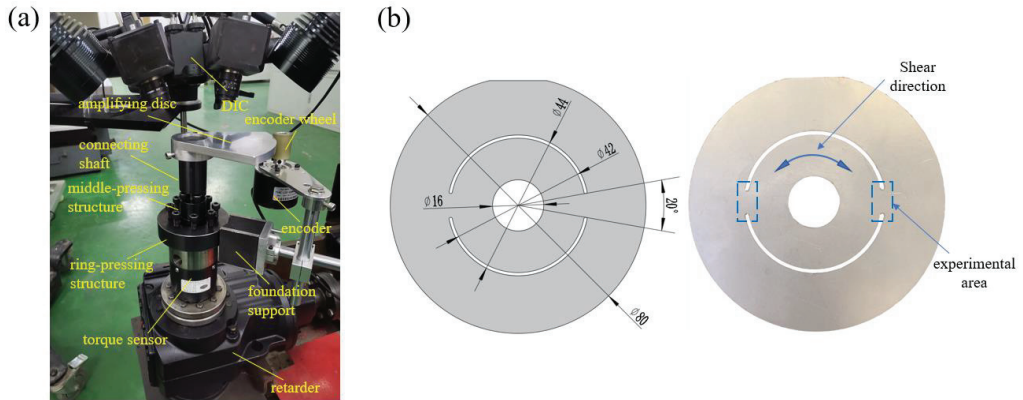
(a) Cyclic shear fatigue testing machine, (b) twin bridge shear specimen.
